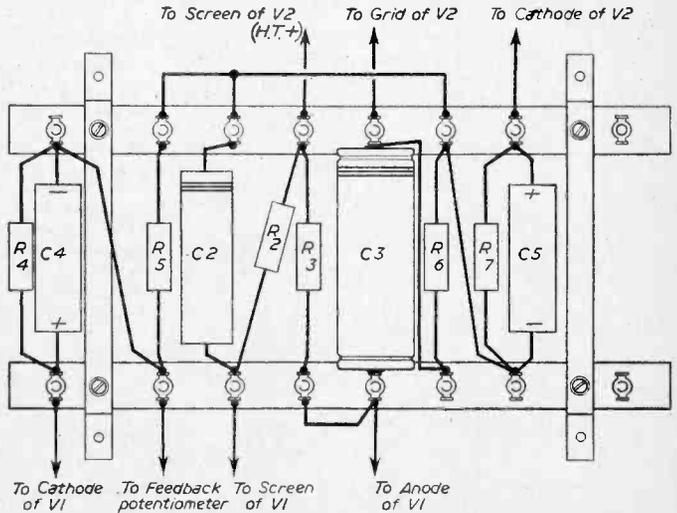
Wiring of the group board upon which the smaller parts are mounted.
